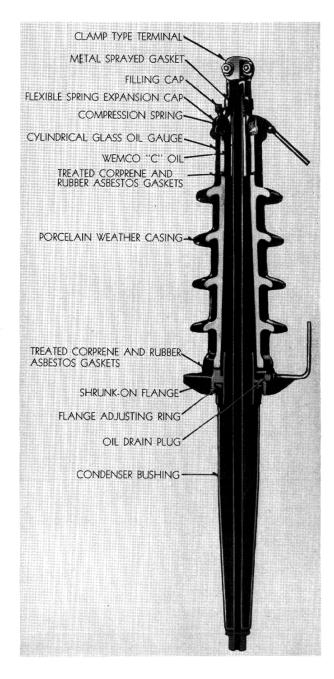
800 Amp., 34.5 KV Oil Encased Condenser Bushing for Type BNO-B Breakers
